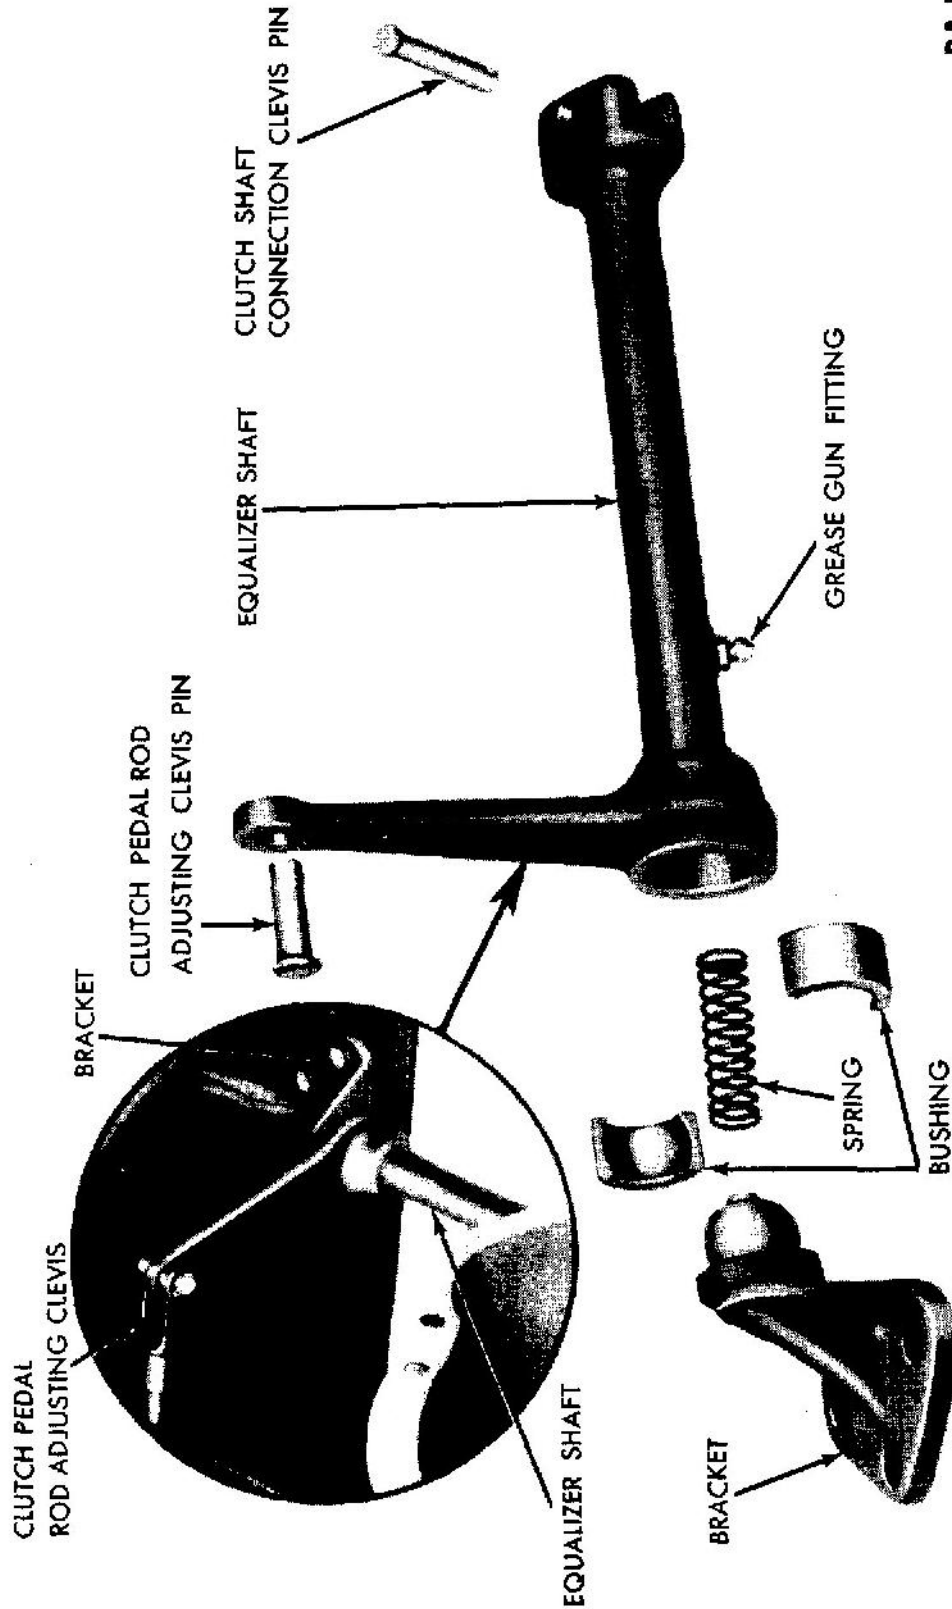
Clutch Release Equalizer Shaft — Disassembled
